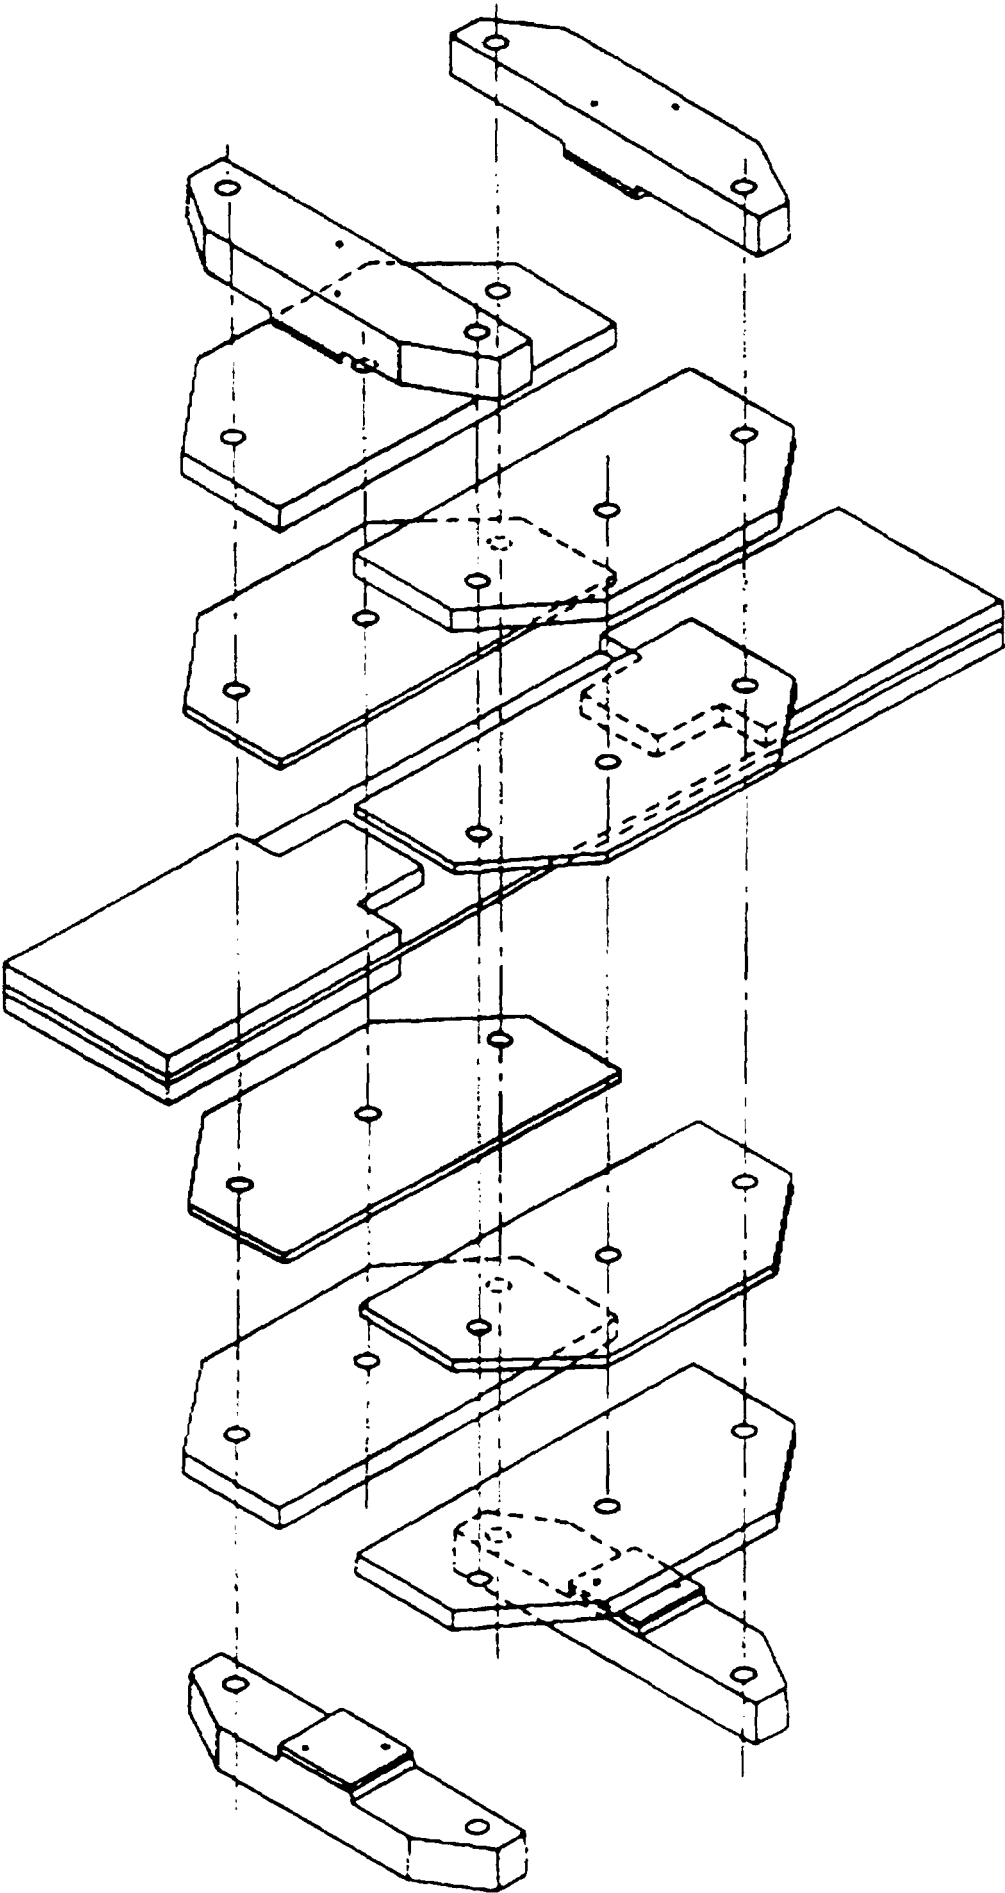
Exploded view of DFVLR anti - Buckling device (113).
